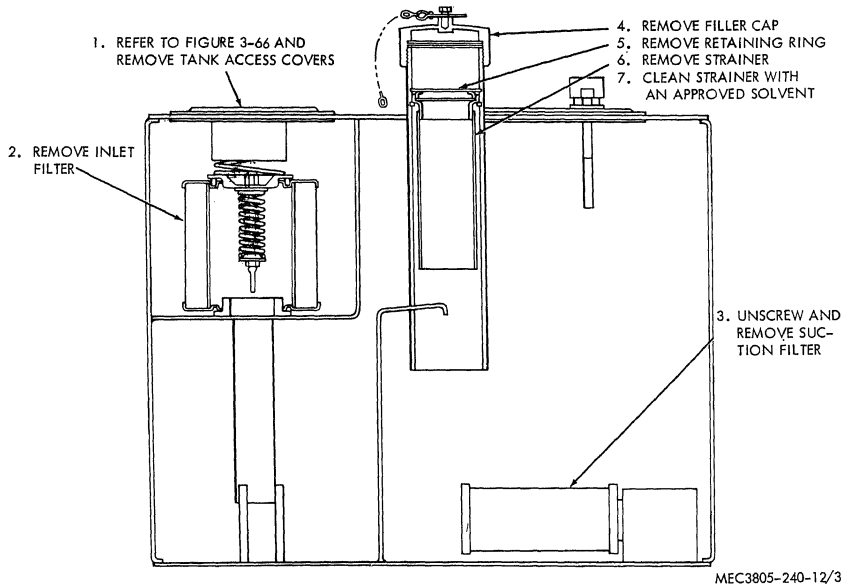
Hydraulic oil tank filters, removal and installation.
